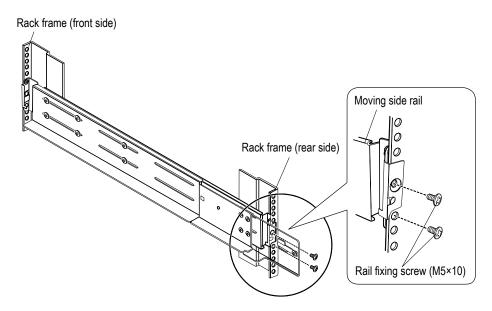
Removing Drive Box (2U) Installation Rails (for Circular Hole) - 1
